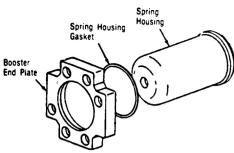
SPRING HOUSING/BOOSTER END PLATE ORIENTATION.
